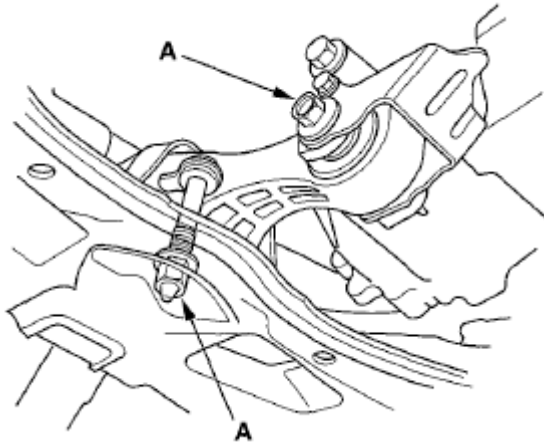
Identifying Torque Rod Mounting Bolt & Nut - M/T Model
